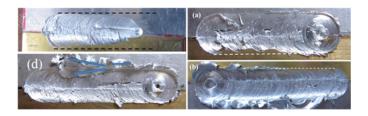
(a), (b) Surface groove defect at upper surface of the weld formed in low pressure. (c) Gradual appearance of flat surface groove defect by decreasing of penetration depth. (d) Effect of extreme penetration depth on the formation of groove defect (color figure available online).
